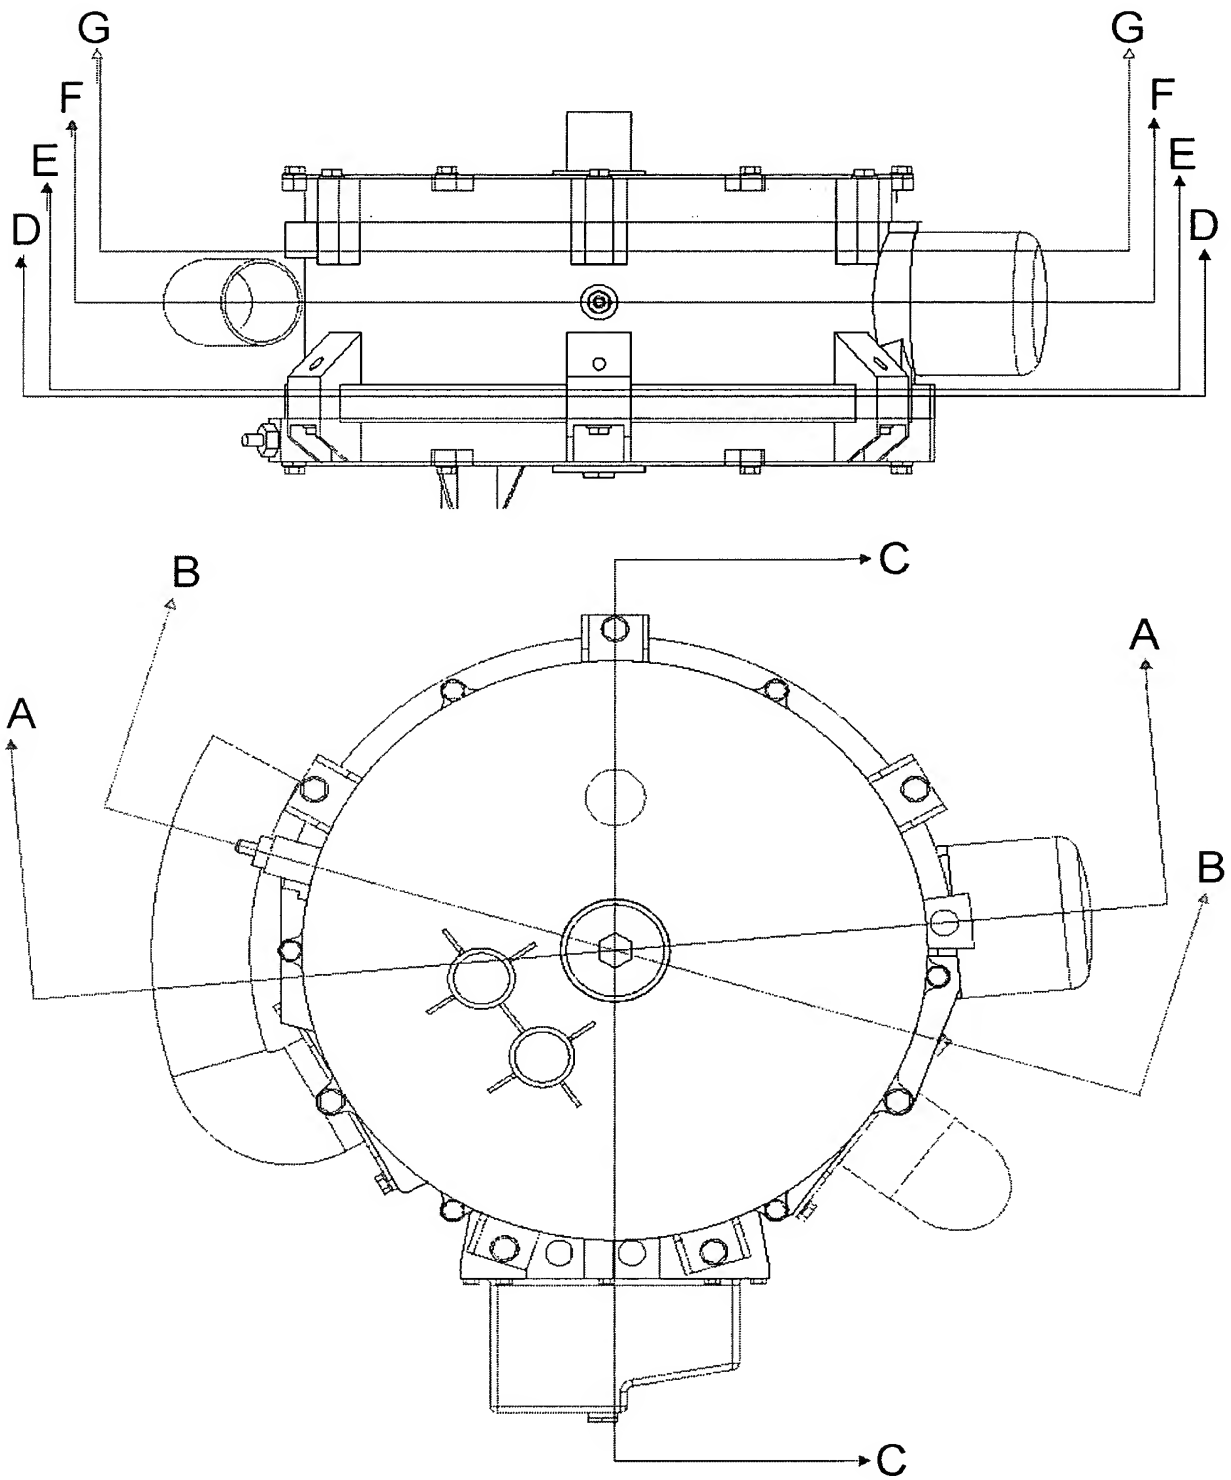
FRONT AND TOP VIEW OF ENGINE
